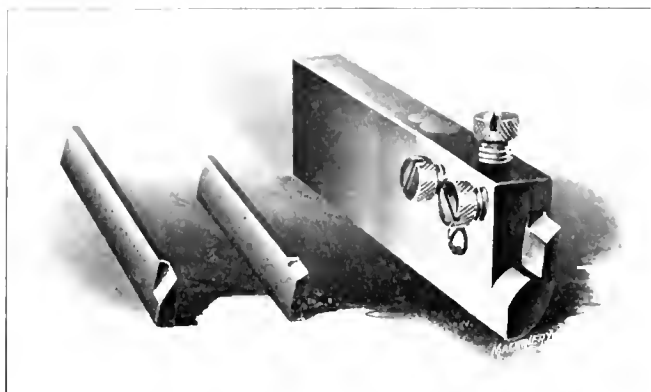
No-clearance Tool for Standard Engine Lathe Tool-post, showing Three Cutters of Different Angles.
